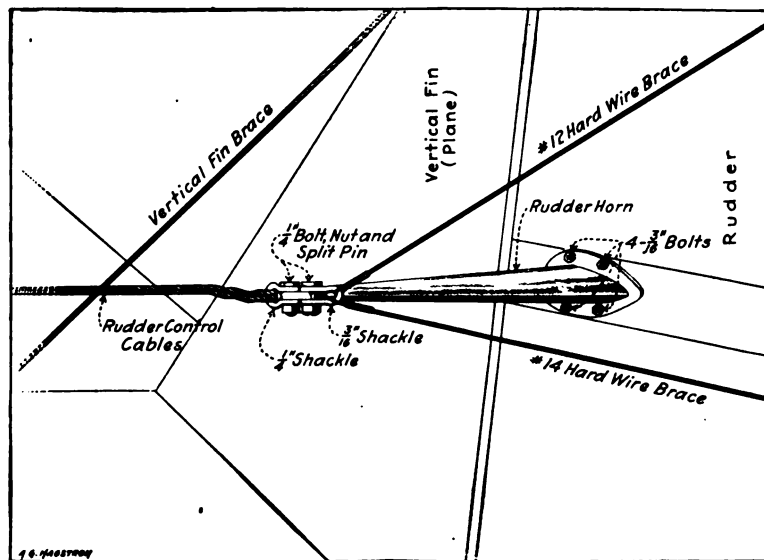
Control Horn of Rudder Showing Double Control Cable, Clevises, and Hard Bracing Wires.
